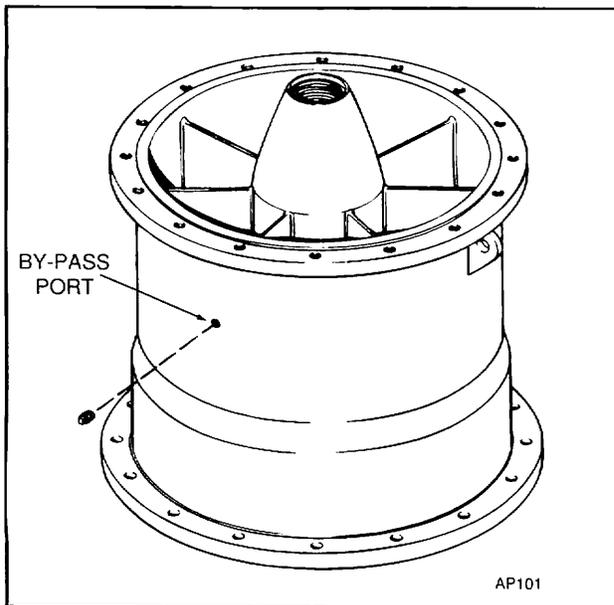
B. Propeller Bowl Assembly - Propeller Pump
